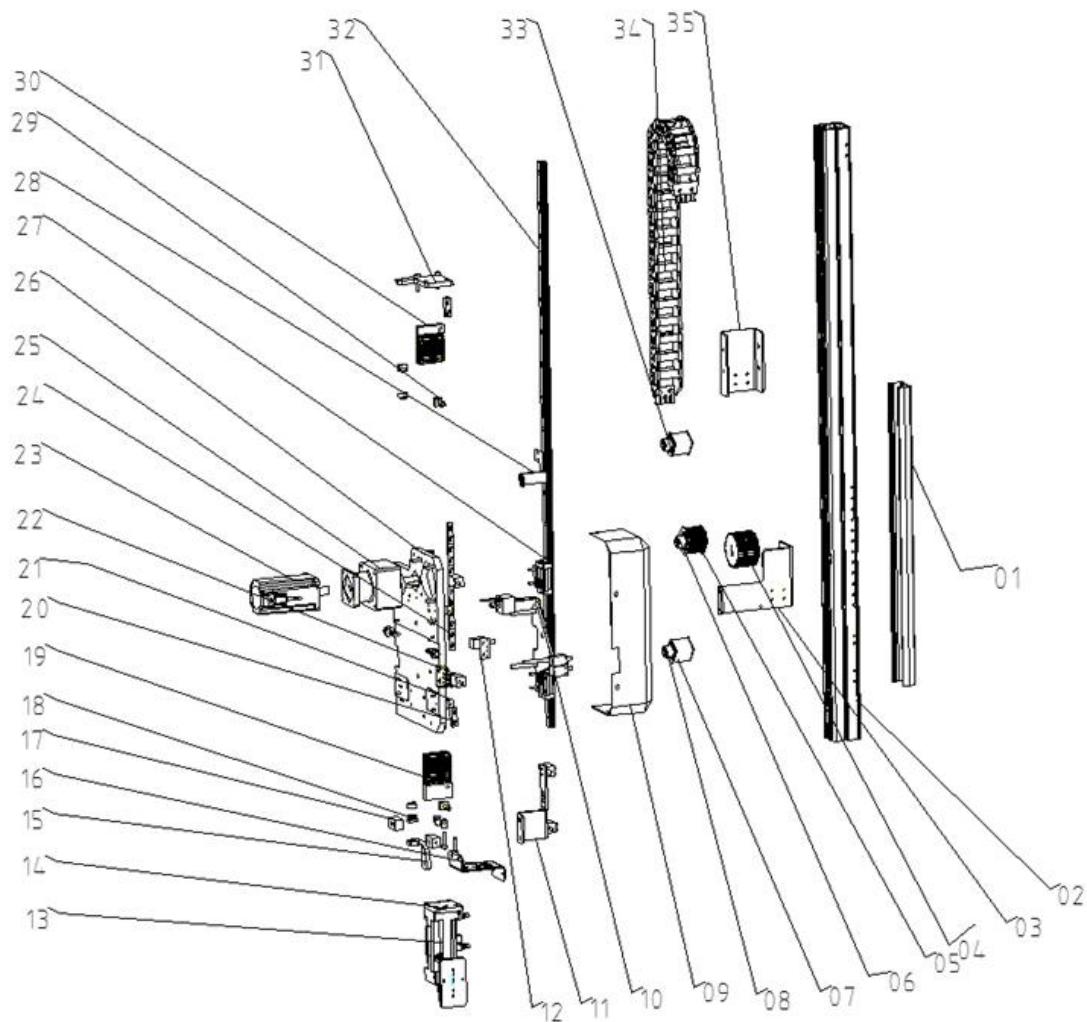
ST3 Main-arm unit (single-stage arm) exploded view
